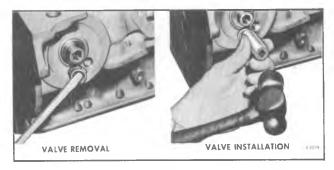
Replacing Oil Filter By-Pass Valve (In-Line Engine)
